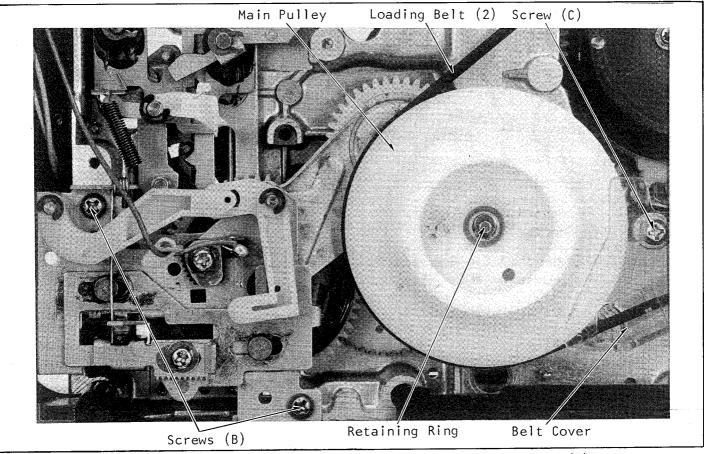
Adjustment of Cam Gear and Mode Select Switch - (9)
